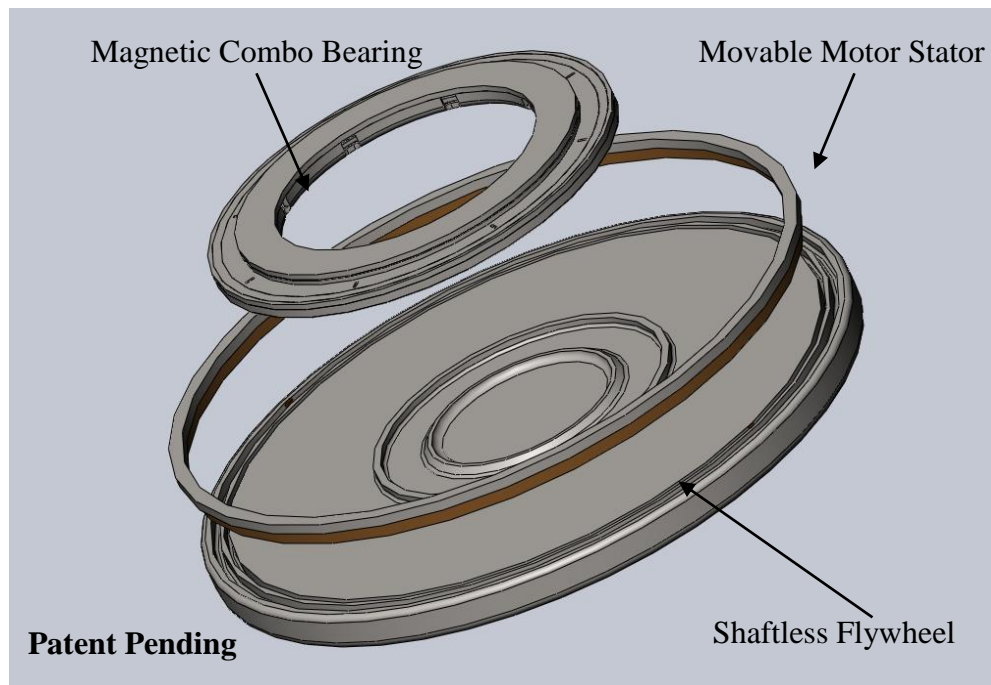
Exploded View of the 3D Model for the Combo AMB
